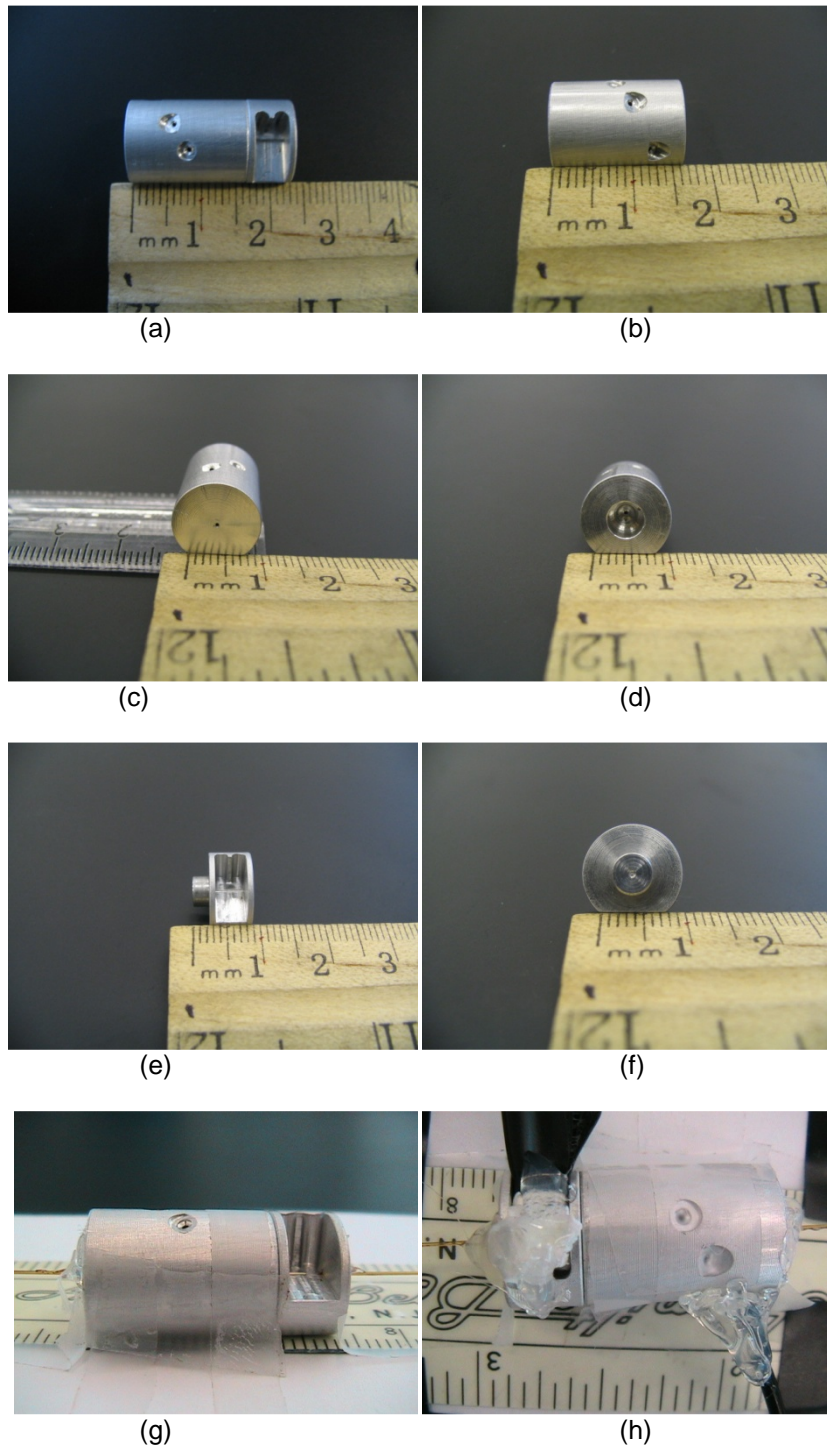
Photographic details of the multi-reflection capillary cell holder. (a) Part A & Part B combined, (b) Part A (front view), (c) Part A (side view), (d) Part A (side view), (e) Part B (front view), (f) Part B (side view), (g) Part A + Part B + Capillary cell, (h) Part A + Part B + Capillary cell + PD + Optical fiber
